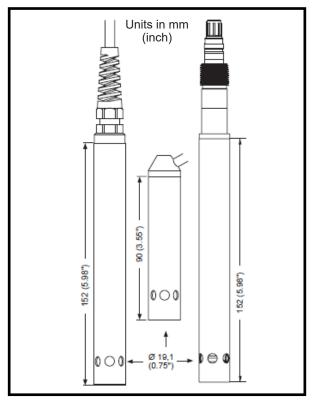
Dimensions SC4A-AD-15 / SC4A-AD-09
